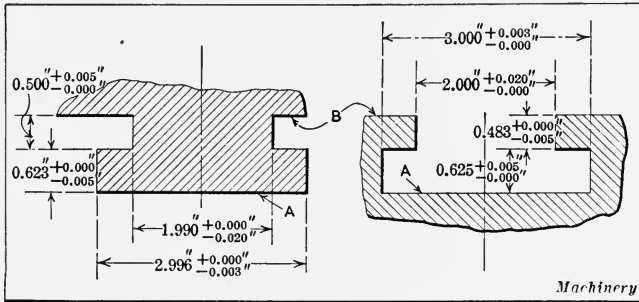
Incorrect Dimensioning of Slide shown in Fig. 8
